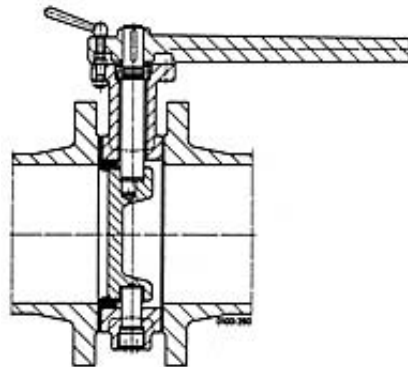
Shut-off butterfly valve of eccentric type with hand lever, for clamping between flanges
